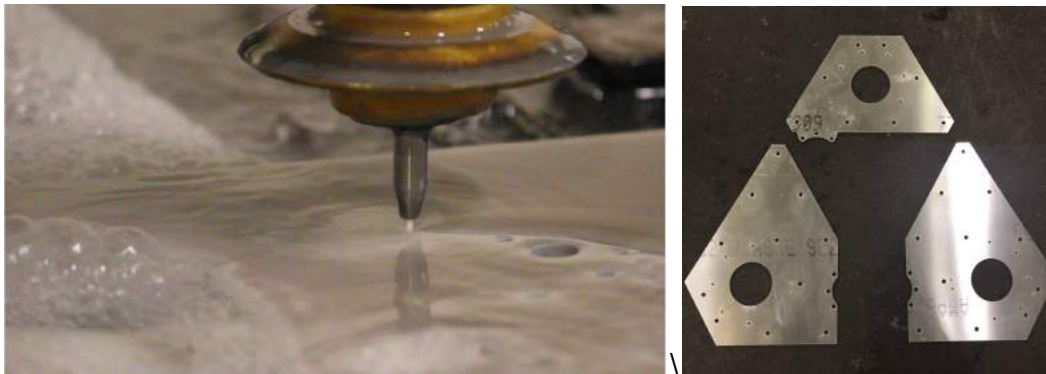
View of Waterjet Cutting Gusset Plates (Left), Plates Post Waterjet Cutting (Right).
